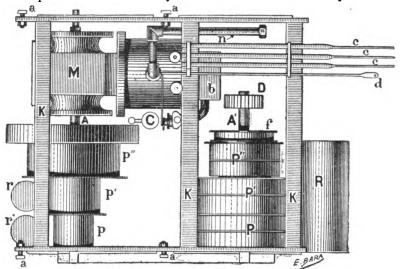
PLAN OF PANTZ MOTOR AND TRANSMISSION GEAR.
